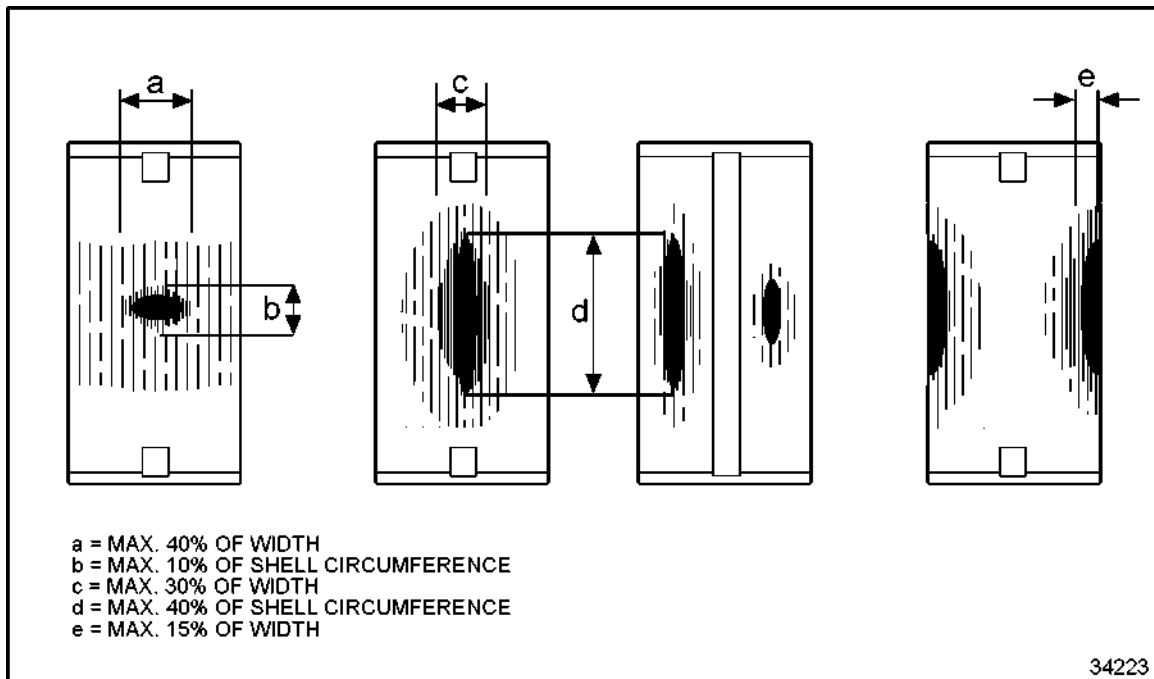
Wear Limits: Borderline Case: Wear Layer Fatigue Fractures and Empty Grooves
